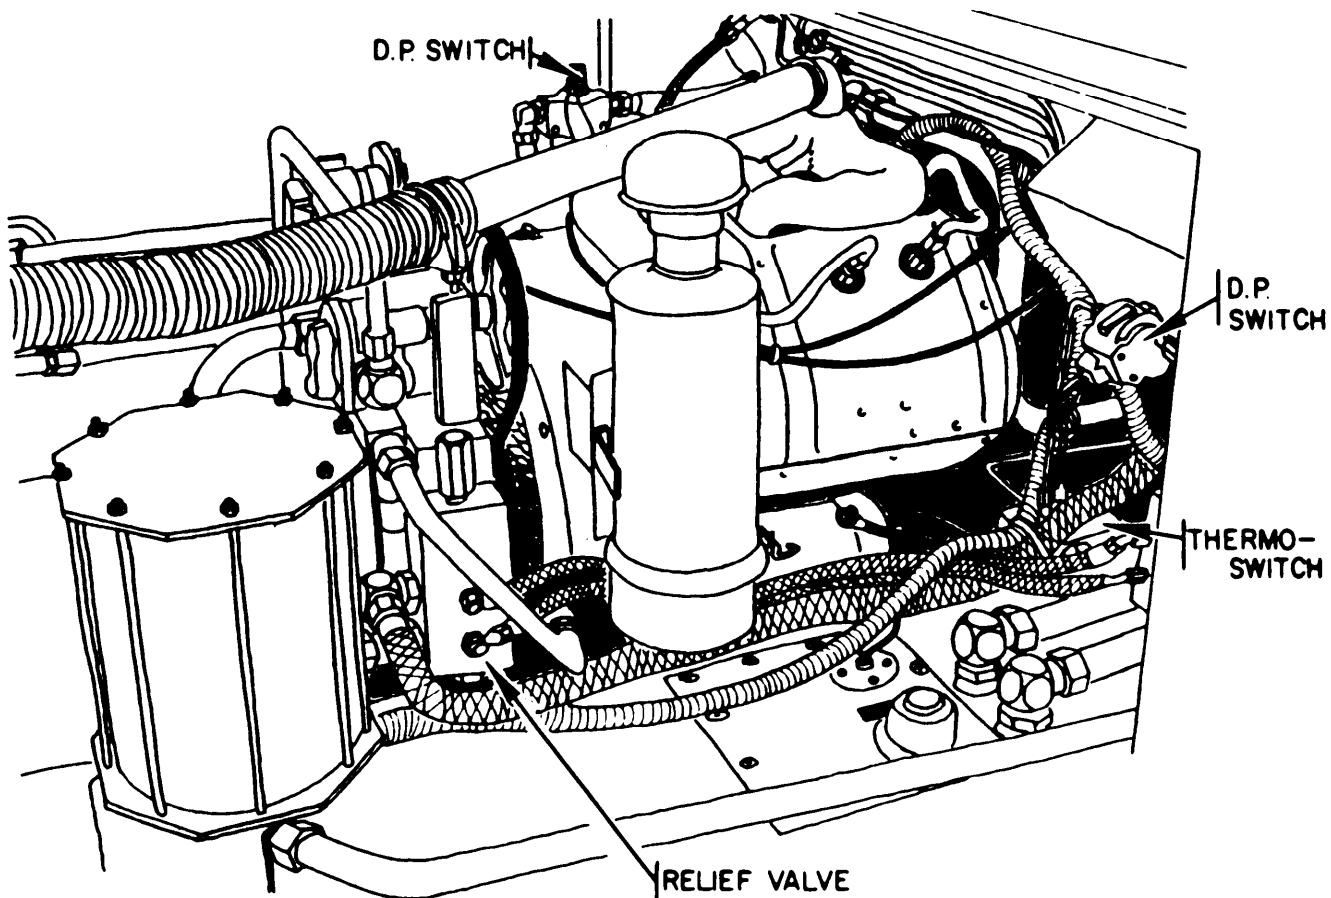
CONTROL PANELS AND HIGH PRESSURE PUMP
